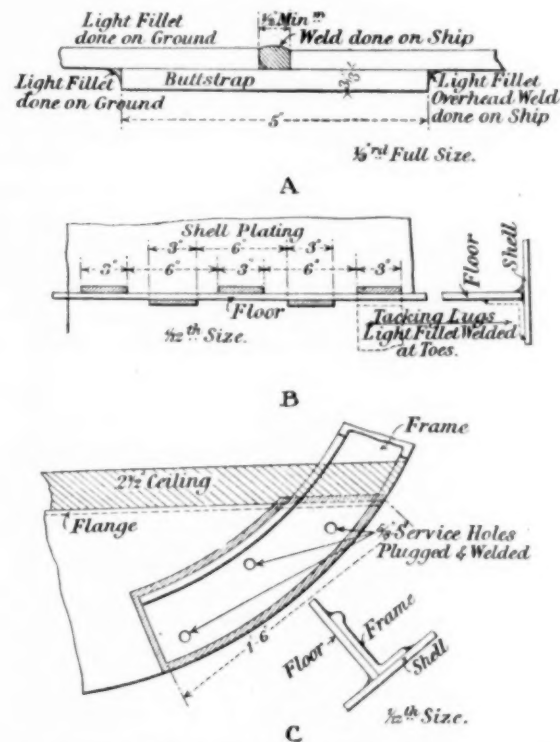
WELDS USED ON THE ELECTRICALLY DRIVEN SHIP *Fullagar
